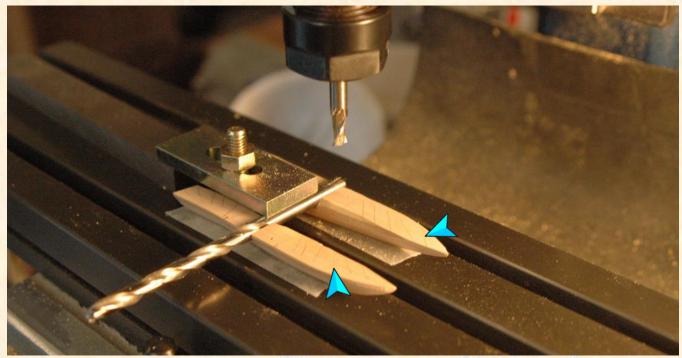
the hawse holes are used to maintain the timbers in a level position (area to be machined marked off and ready to machine)
